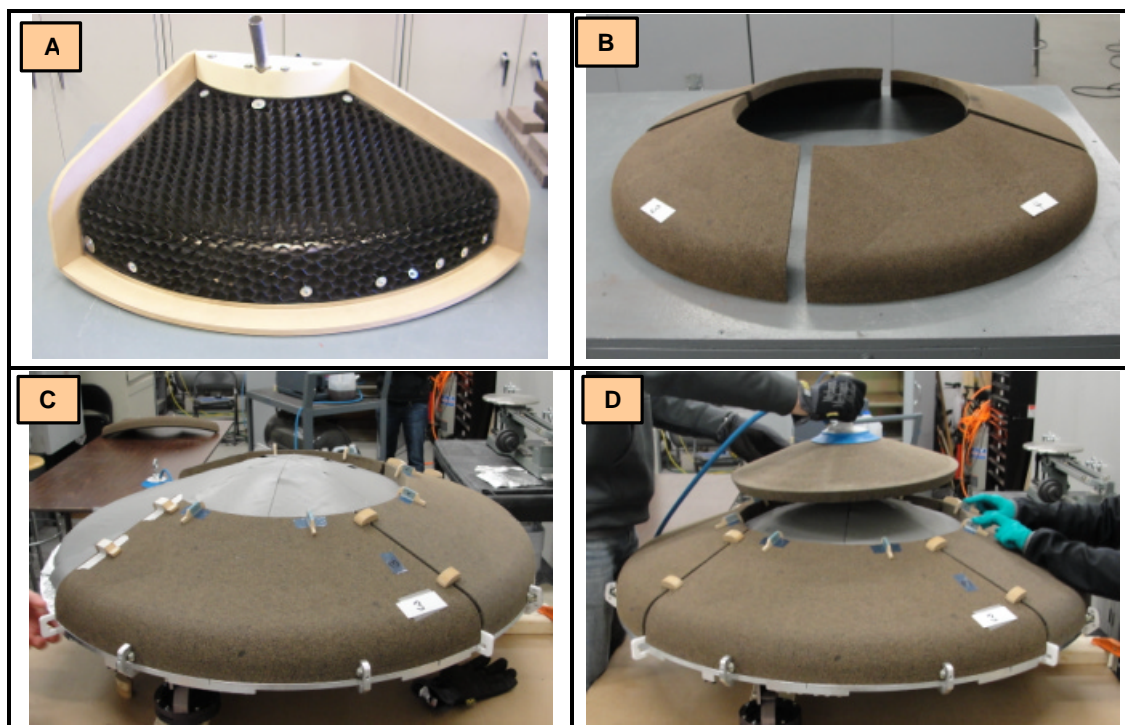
H/C Packed 1.0-m Ablator Modules Molded and Milled then Bonding to Structure
